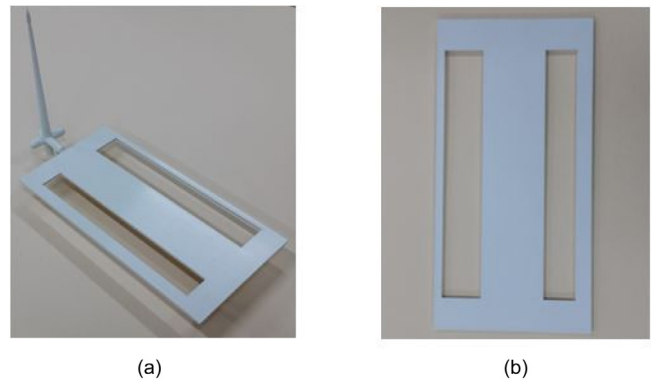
The molded stress lattice used for the experiment. (a) Before removing the gate, sprue and runner, and (b) after removing the gate, sprue and runner.
